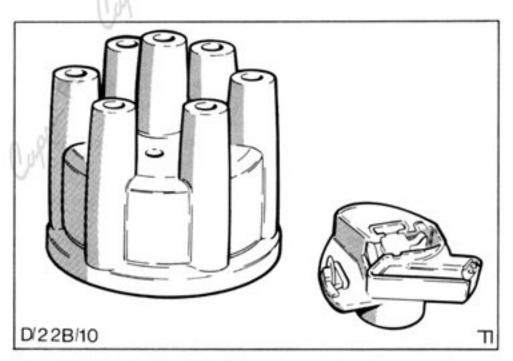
Check distributor cap and rotor arm for hairline cracks, damage or excessive arcing.
